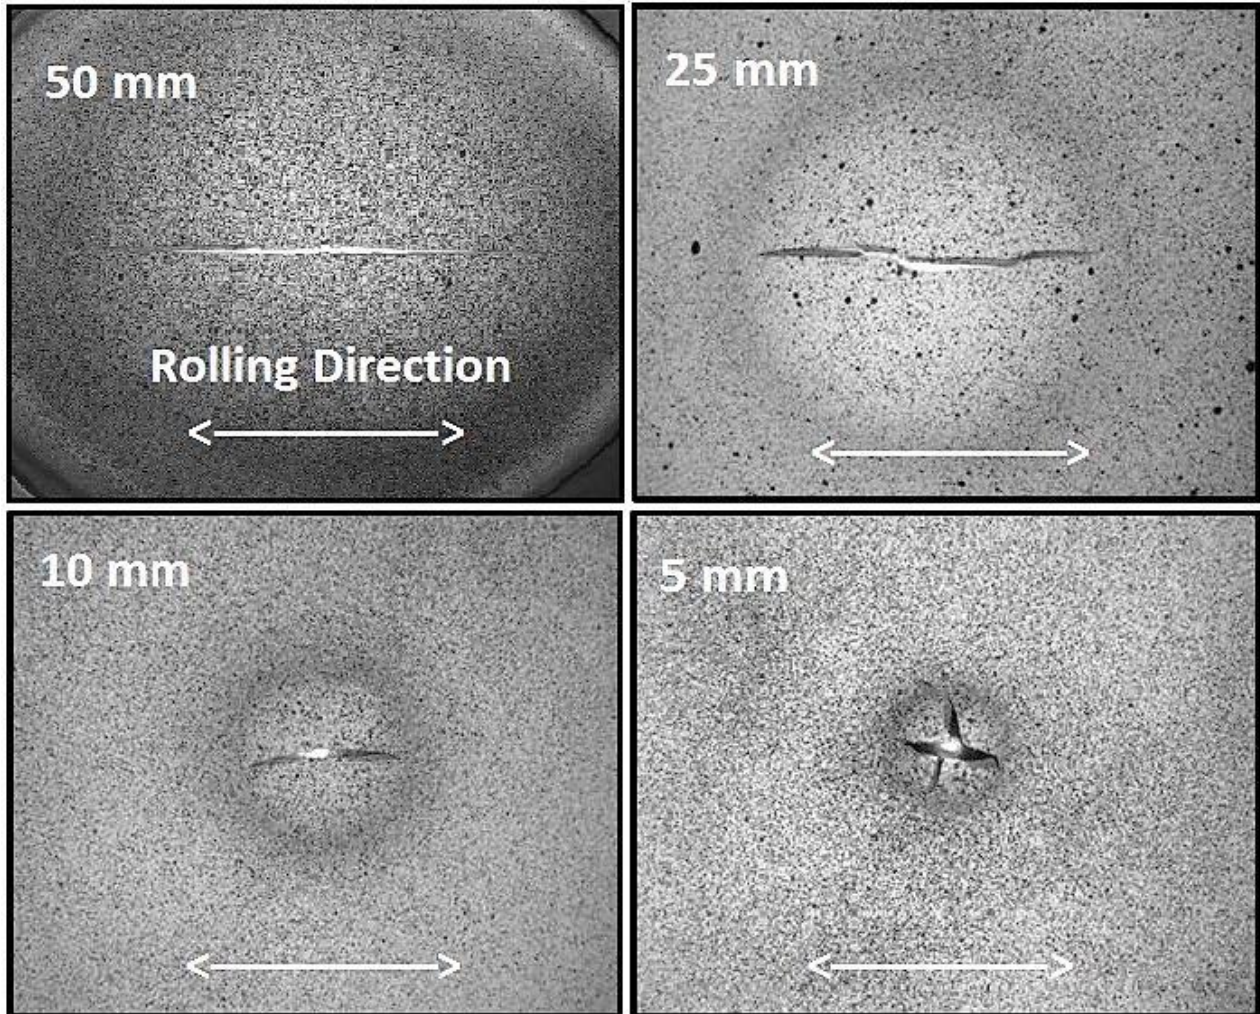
Shape of the post-failure crack of DP980 ( $t=1.6\text{mm}$ ) specimen using punch radius of 50 mm (top left), 25 mm (top right), 10 mm (bottom left), and 5 mm (bottom right)
